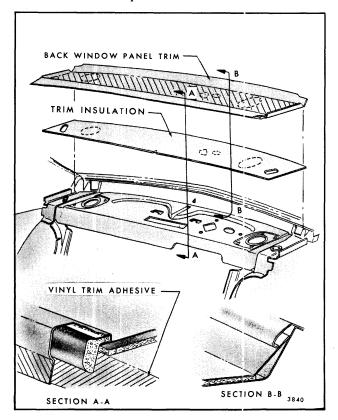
Back Window Panel Trim Attachment All Styles
